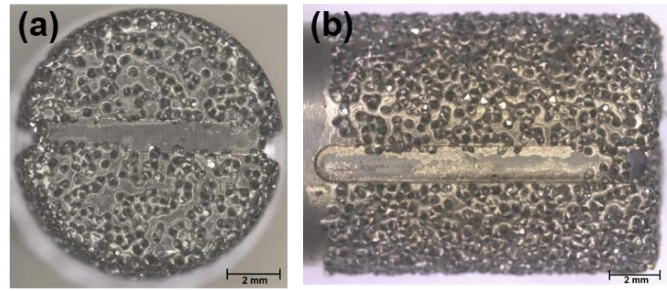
Top and side view of the 10 mm diameter of the abrasive diamond tool.
